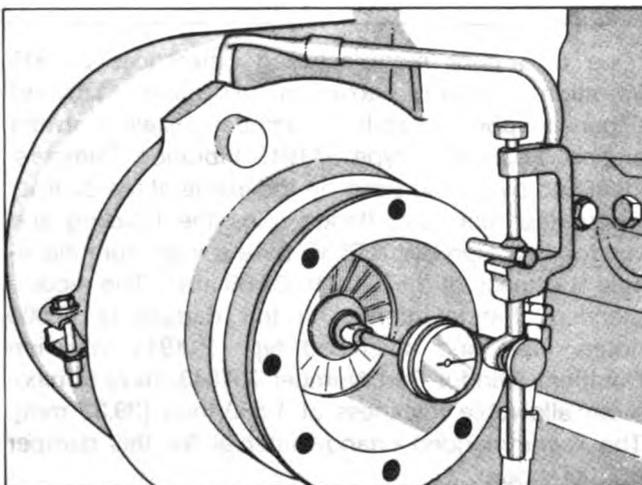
(OM1065L). Check turbocharger bearing end clearance
